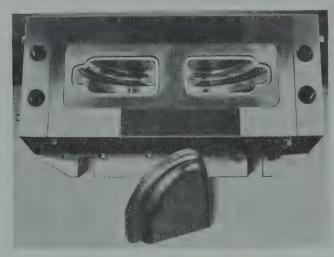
Mold produced by hobbing and hob used. (Courtesy of General Electric Company.)
